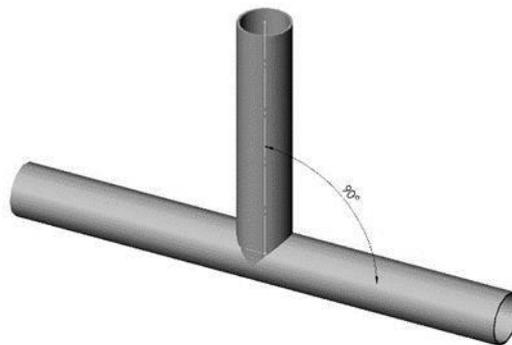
Roll Cage, Welding Sample 1
